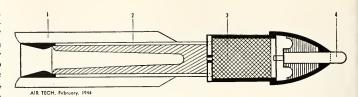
The German aircraft rocket shell probably resembles the sketch below. Points indicated are, 1. Fins; 2. Rocket charge with center bore to increase burning surface; 3. High explosive charge; 4. Fuse is of contact type, exploding on impact and connection between rocket and explosive charges causes explosions when former is exhausted in rocket. Projectile weighs approximately twelve pounds, is thirty inches long.
